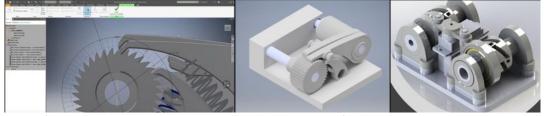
(left to right): double ratchet pawl mechanism (inventor simulation), CAD, Forward-Backward Switching Mechanism
